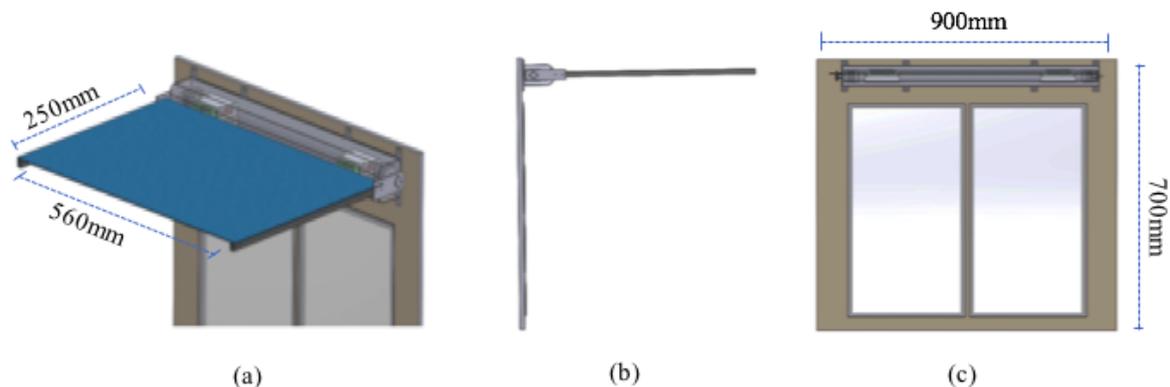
Automated shading device design: (a) isometric view; (b) side view; (c) front view.
